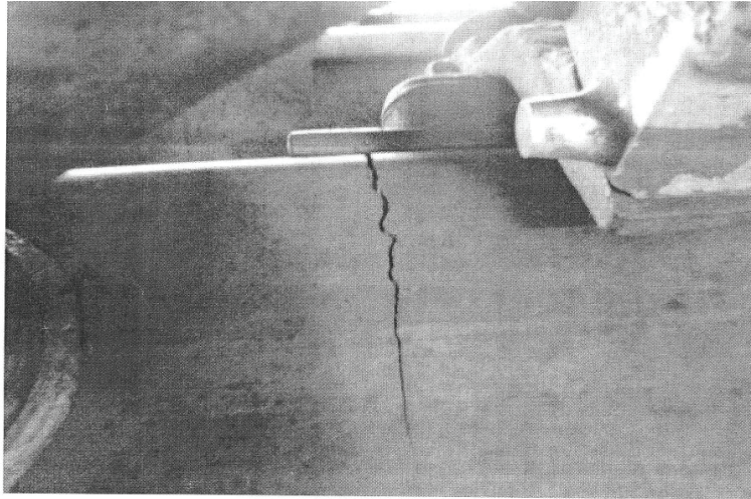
Photograph of the fatigue crack of longeron type frame
